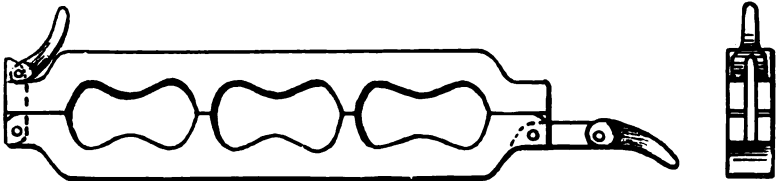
Gang Mould for Standard Cement Briquettes.
